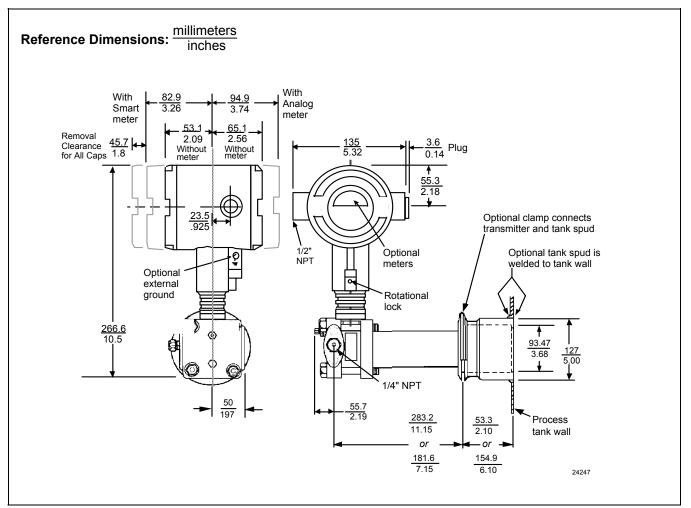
Approximate mounting dimensions for STF92F and STF93F pseudo flange type
